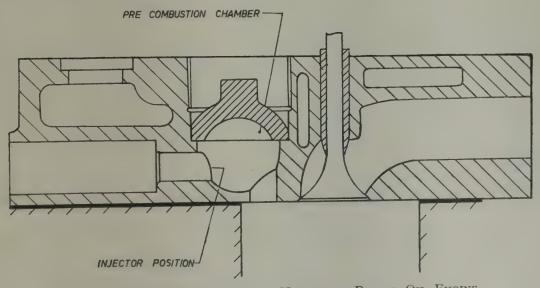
Combustion Chamber of Kirloskar Petter Oil Engine
